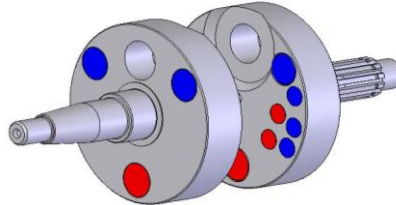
Example TM 125 K9-C / KZ10 crankshaft modification
